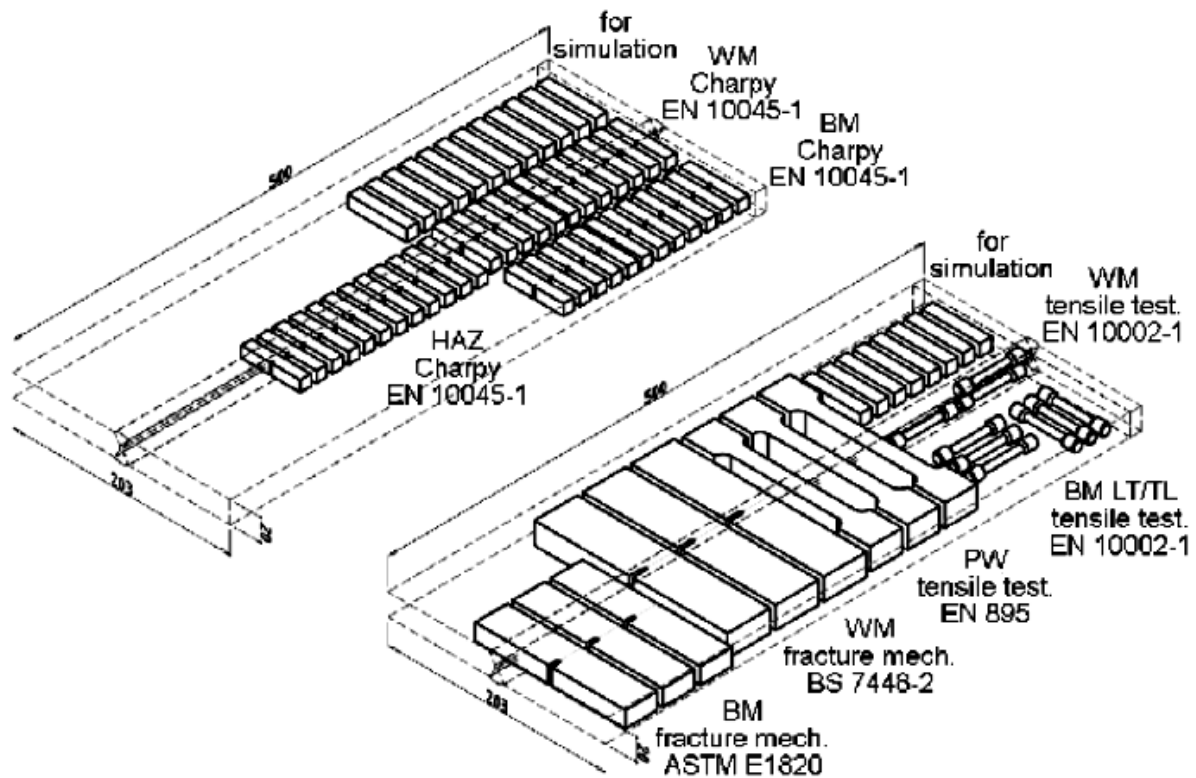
Location of Test Specimens on Welded Test Plate Over 3/8 in [10 mm] Thick—WPS Qualification (see 6.10)
